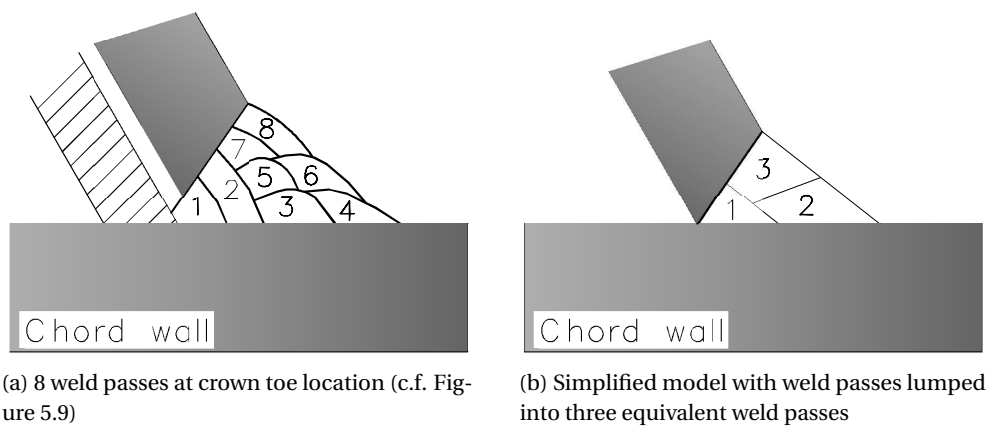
Weld pass reduction for 8-pass K-joint weld; Cross section of lumped weld pass 1 is 20% of total weld cross section and cross sections of weld passes 2 and 3 are 40% of total weld cross section each.
